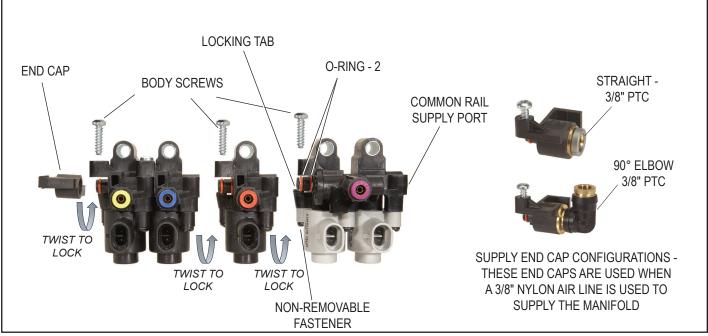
ASSEMBLING THE BENDIX® SMS-9700™ SOLENOID
